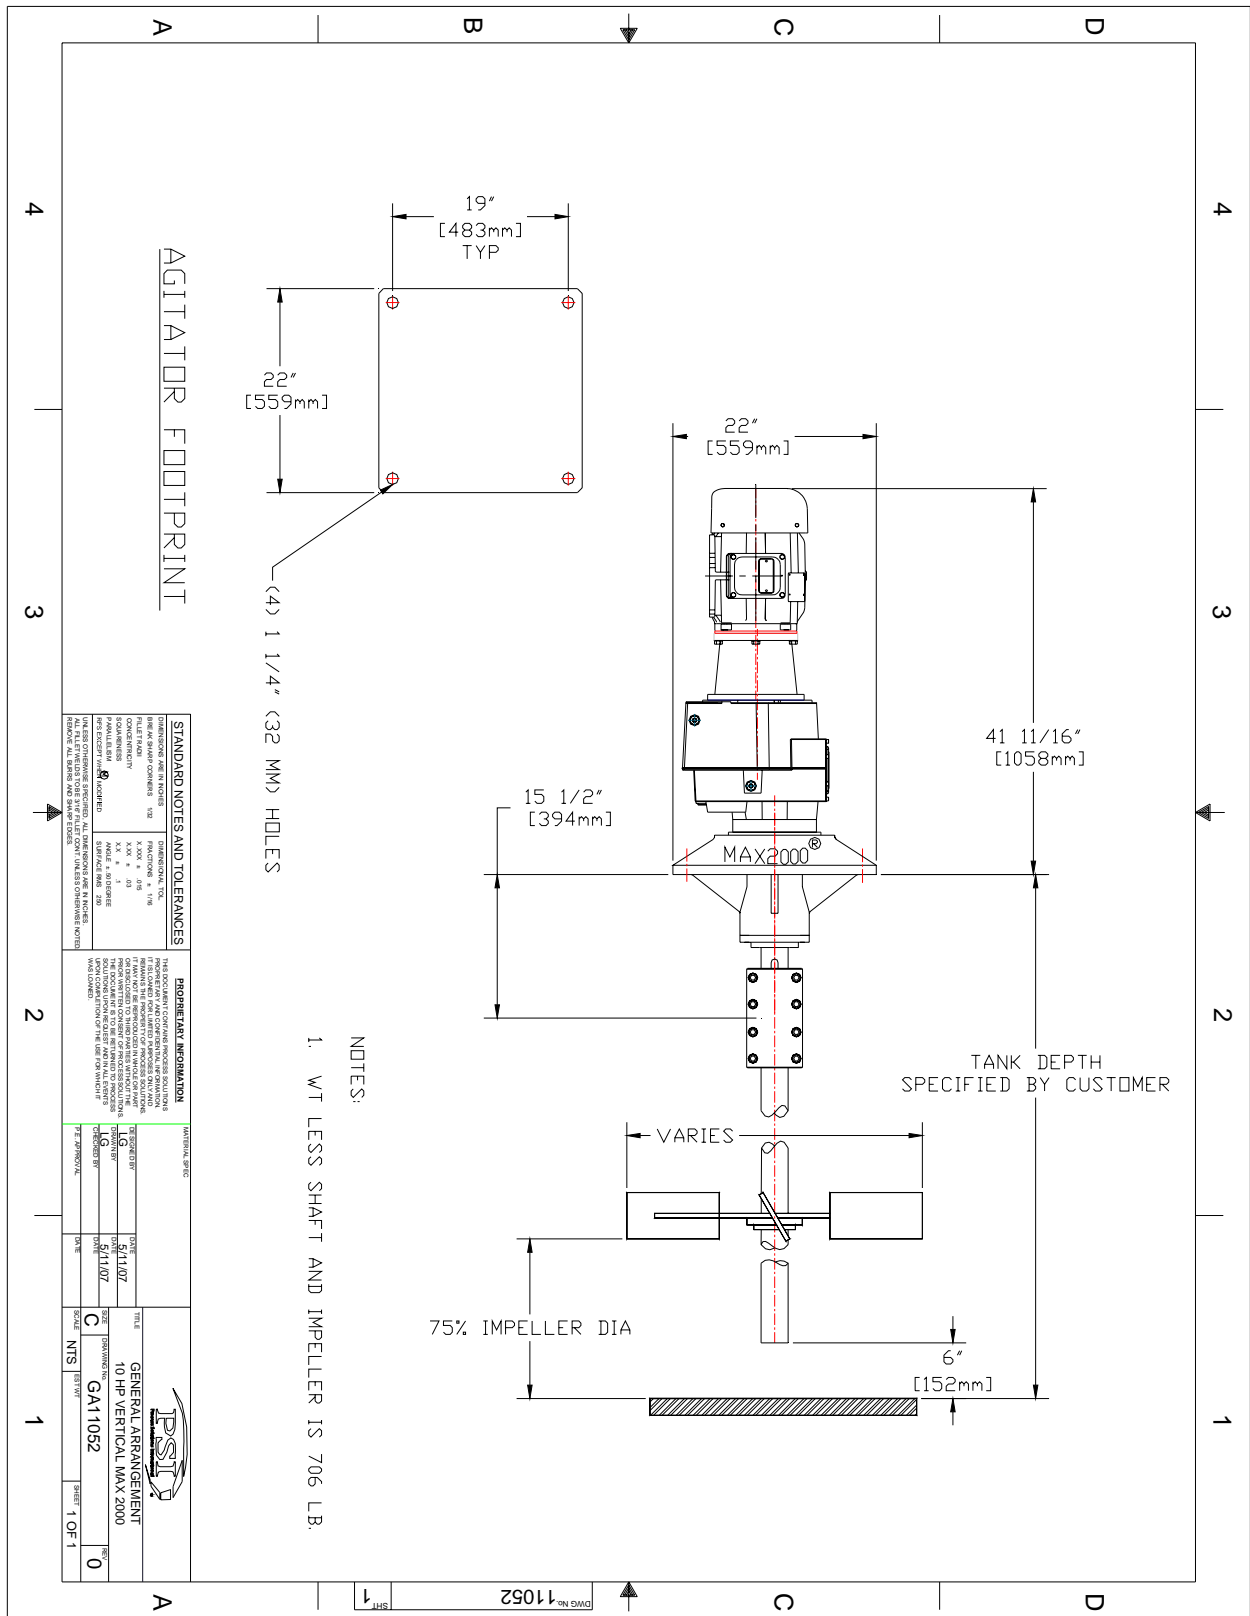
DIMENSIONAL DRAWING MAX-MA10V
